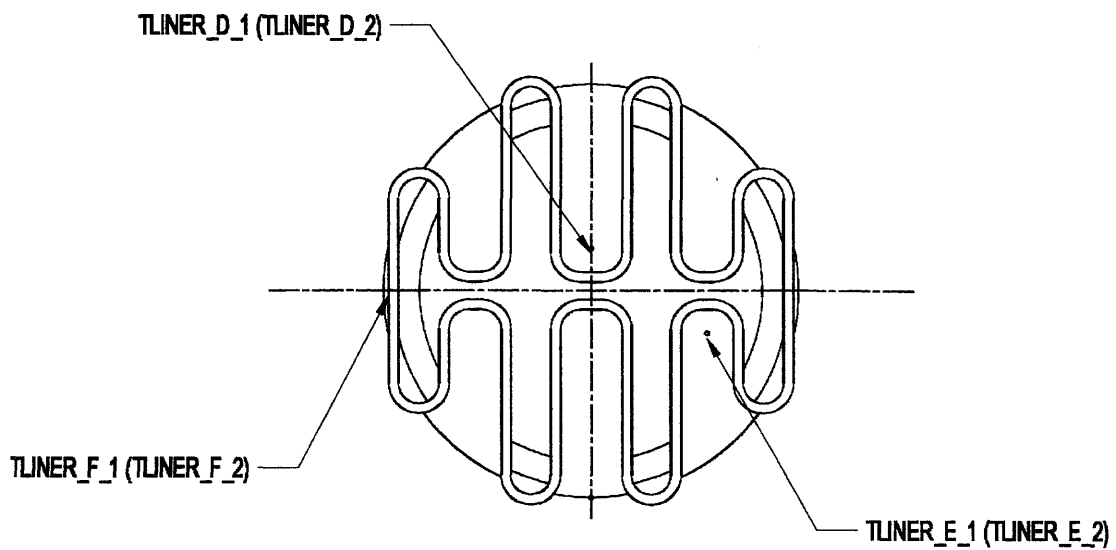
Module 1 (& Module 2) Thermocouple Locations on Convoluted Rich Zone Liner Aft-Looking-Forward View
